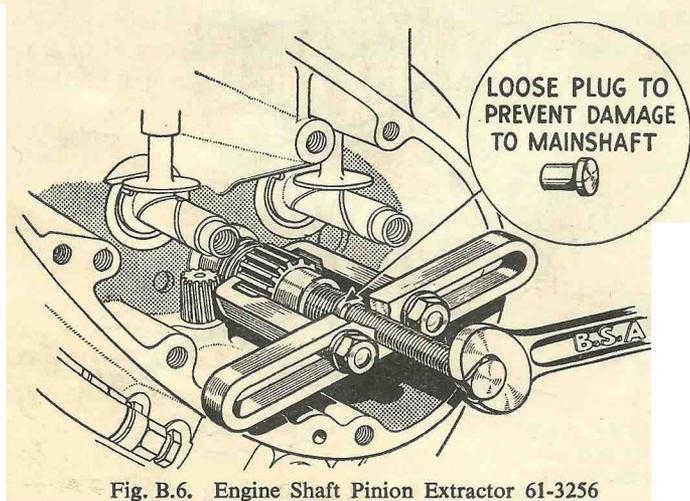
Engine Shaft Pinion Extractor 61-3256
